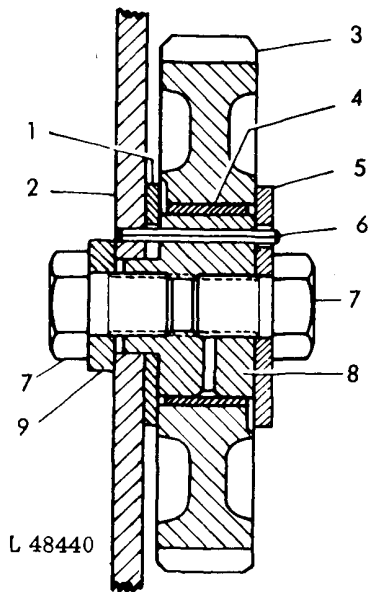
Lower Idler Gear and Its Support - Sectional View
